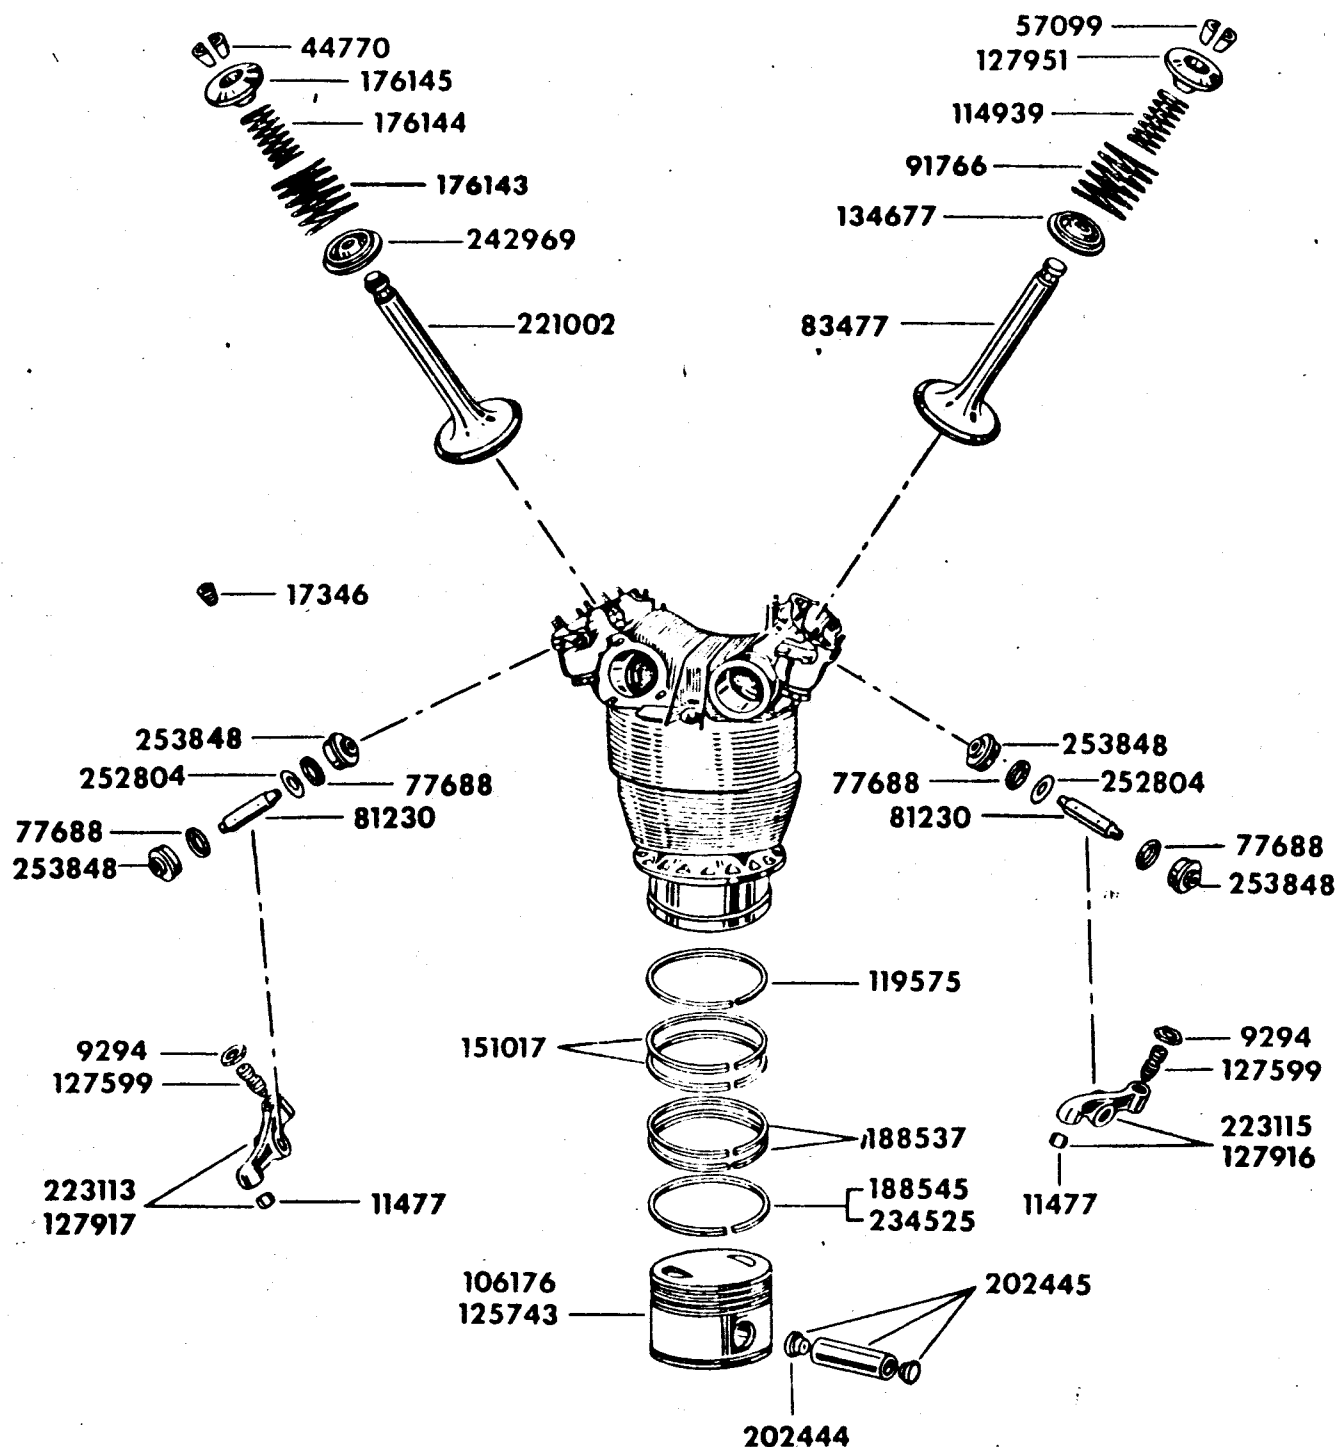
Valves, Valve Rockers, Pistons and Pistonrings
